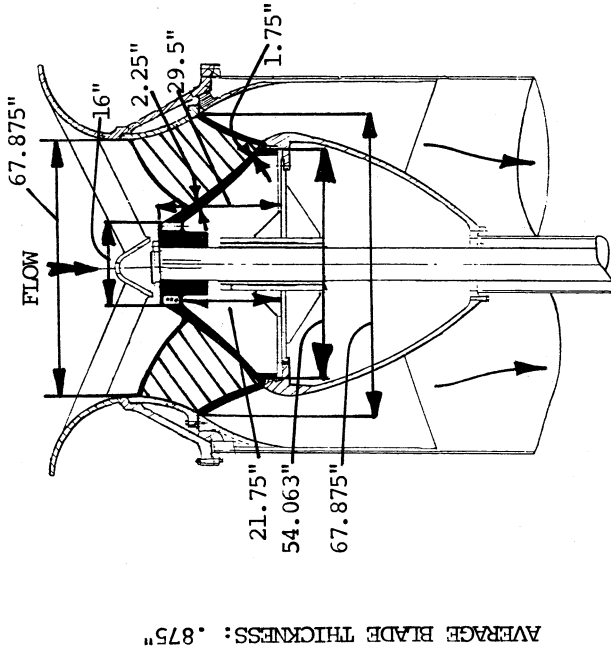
CROSS SECTION OF IMPELLER IN PUMP CASE
